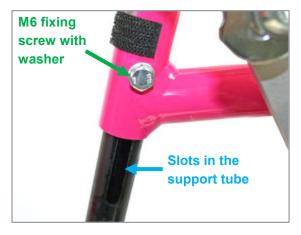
M6 fixing screw with washer and slot in footrest support tube for adjusting the lower leg length
